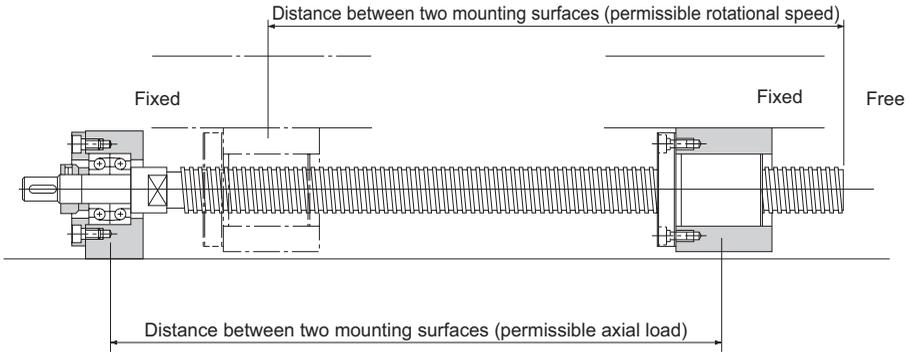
Screw Shaft Mounting Method: Fixed - Free
